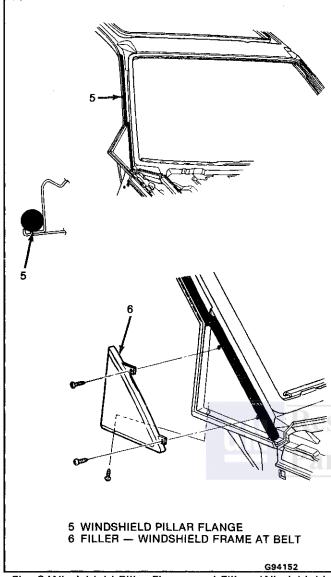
Windshield Pillar Flange and Filler - Windshield Frame at Belt
